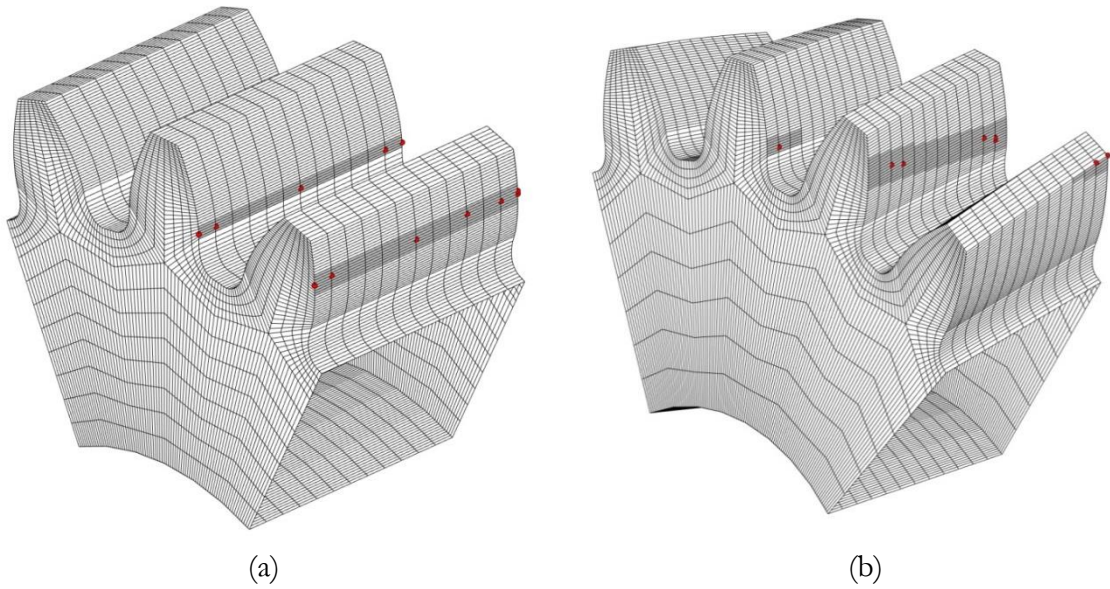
Reduced mesh in the nodal ECSW scheme of a spur (a) and helical (b) gear
